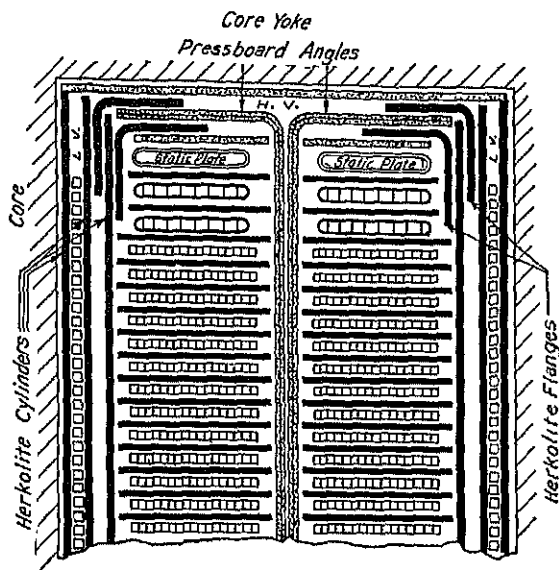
Sketch showing section through window of a high voltage concentric disc type transformer.
